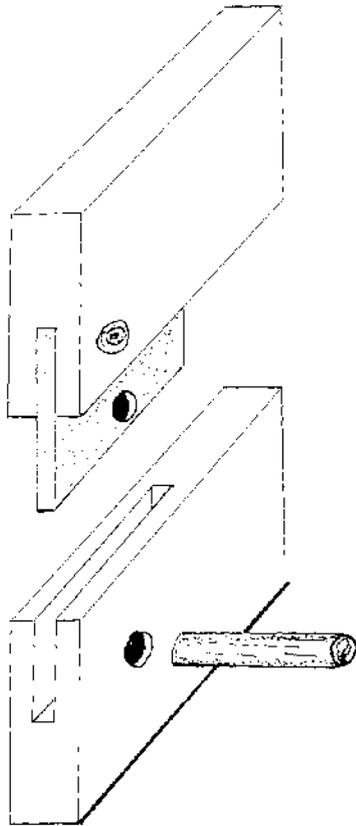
Exploded view of planks with pegged mortise-and-tenon joint.
